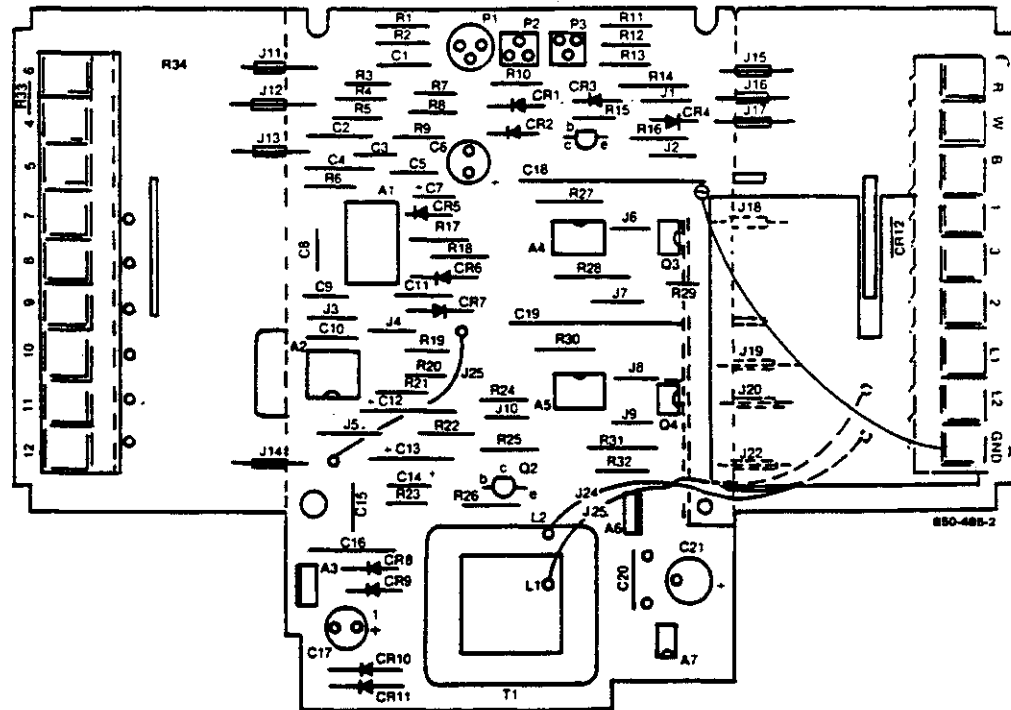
120 V and 220/240V - Printed Wiring Board Assembly
